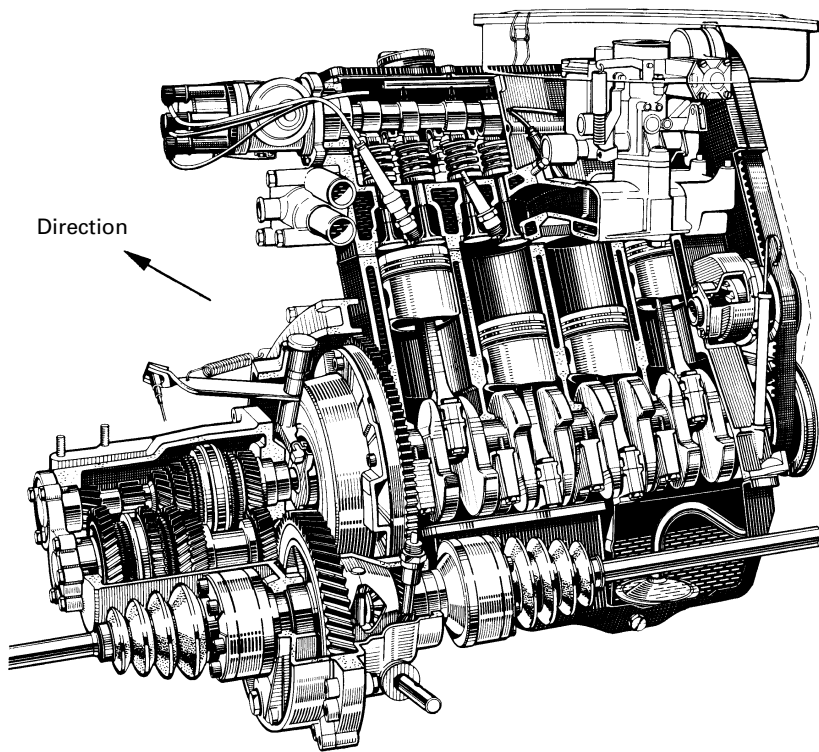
Layout of transverse engine, manual gearbox and differential on the VW Polo. Because the arrangement is offset, the axle shaft leading to the left front wheel is shorter than that leading to the right one. The shifter shaft between the two can be seen clearly. The total mechanical efficiency should be around $\eta \approx 0.9$.
